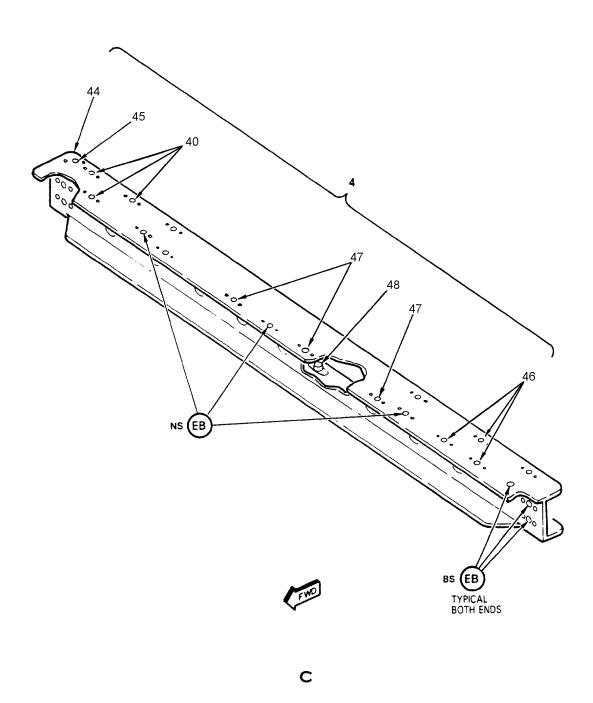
Upper and Lower Support Assemblies (Sheet 4)
